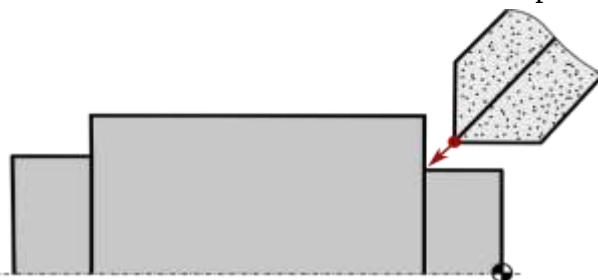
Plunge grinding of a cylindrical surface without face contact using CYCLE413
